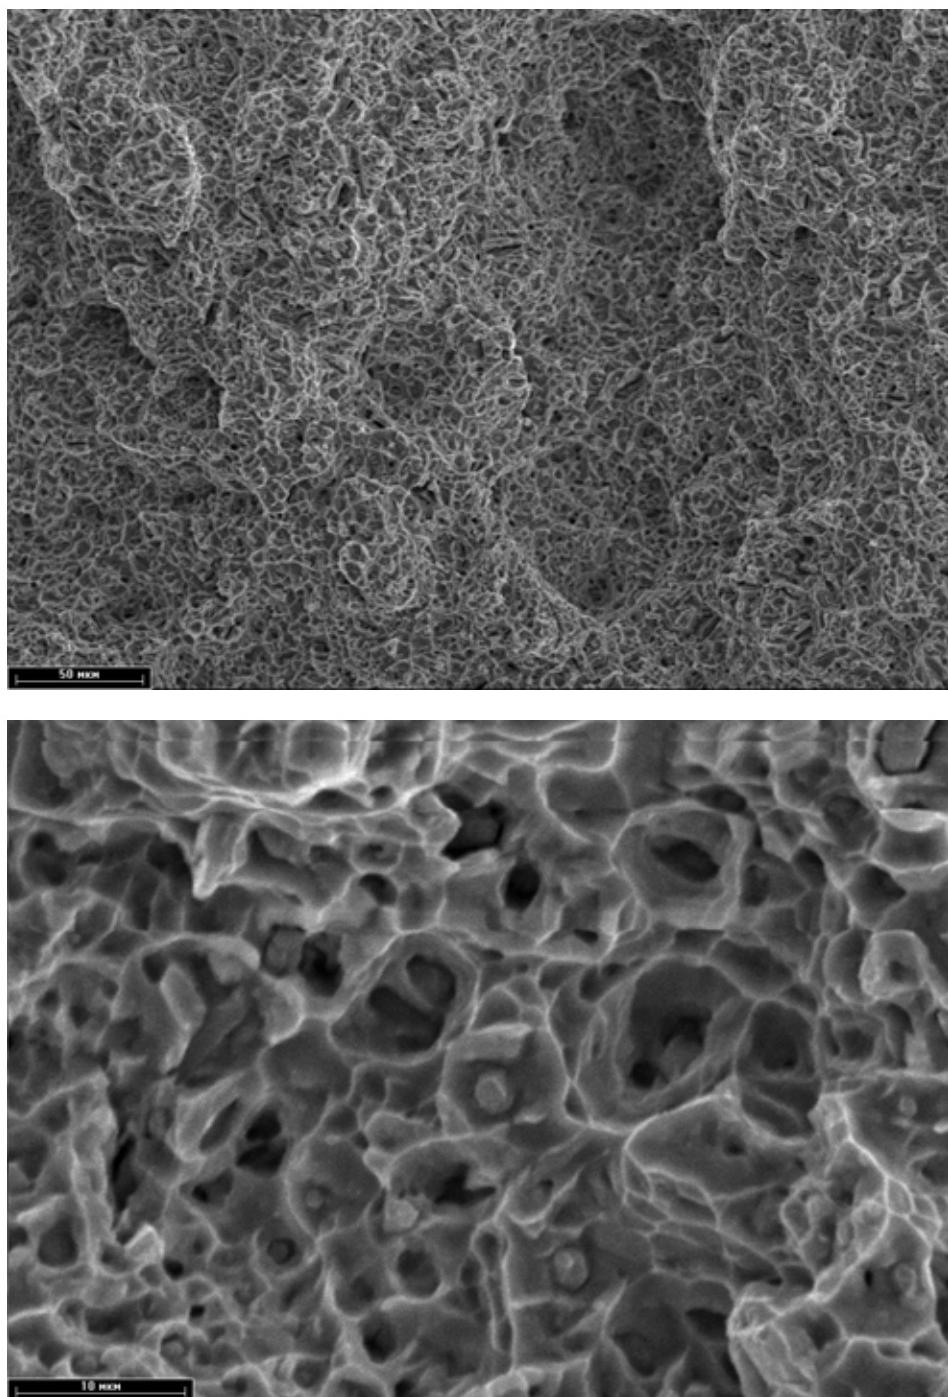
Fracture surface of 3.4 specimen ($\alpha+\beta$ -rolled condition).
